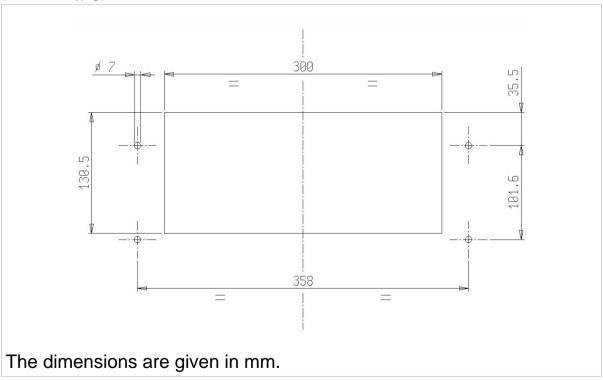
Panel drilling measurements for rack-mounted version (citi0403.jpg)
